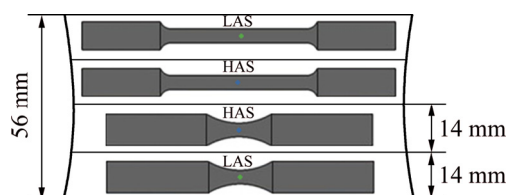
Schematic positions of uniaxial tensile and HCF test samples extracted from forged workpiece
